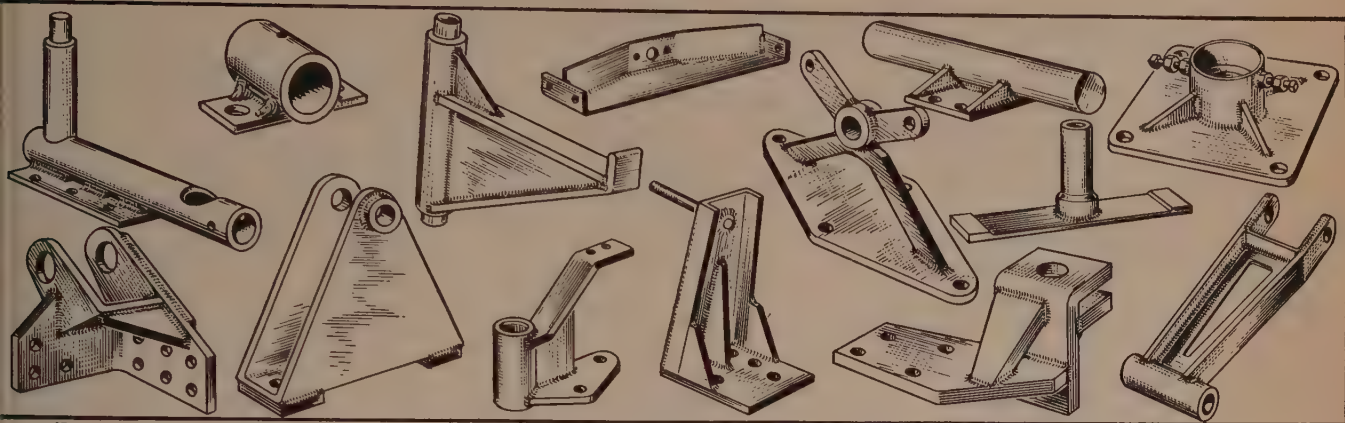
Typical machinery brackets for various applications built at lower cost with arc welding.
